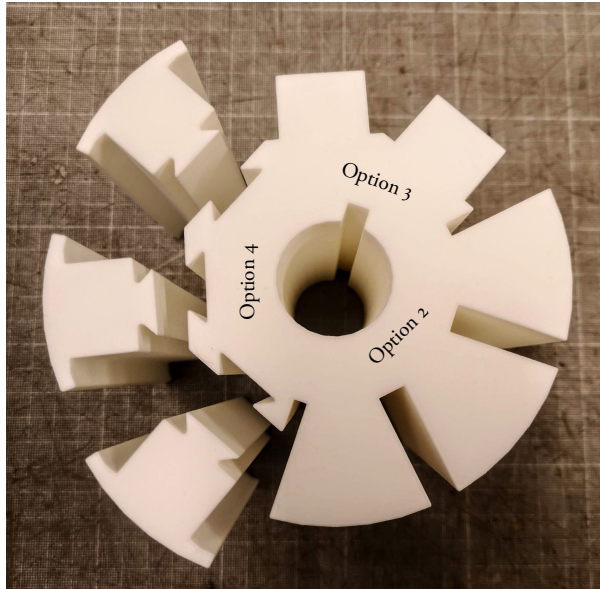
Photo of 3D printed rotor for winding tests, with rotor design options 2-4 marked.
